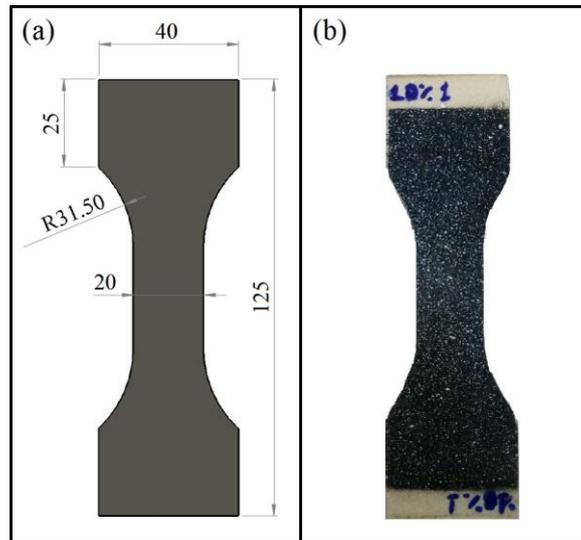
(a) Tensile specimen dimensions; (b) Specimens after machining
